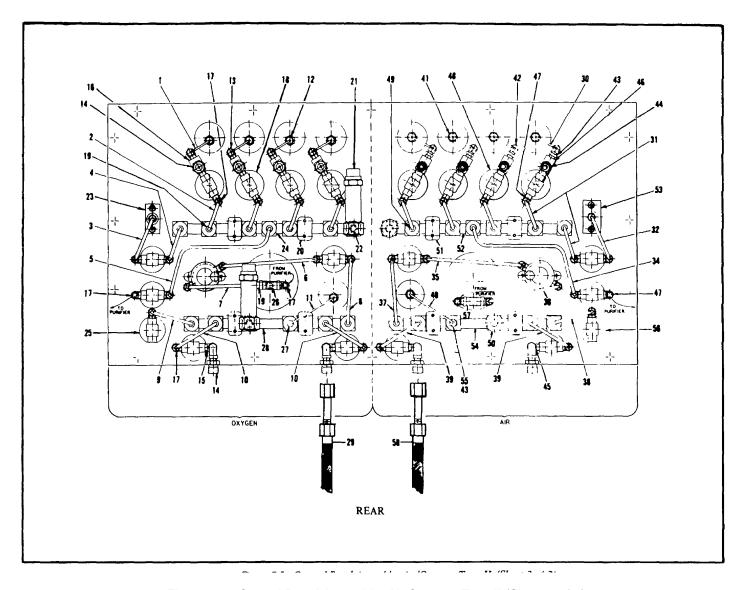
Control Panel Assembly, Air Oxygen, Type II (Sheet 2 of 2)
